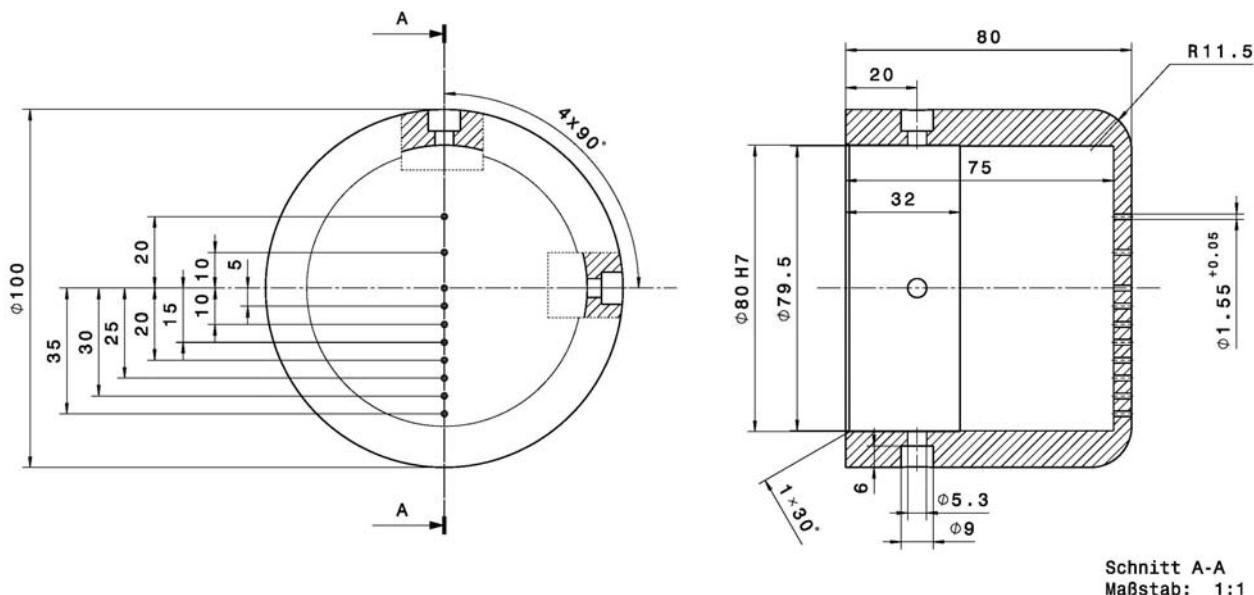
Technical drawing of the SACOMAR test model for HEG.
